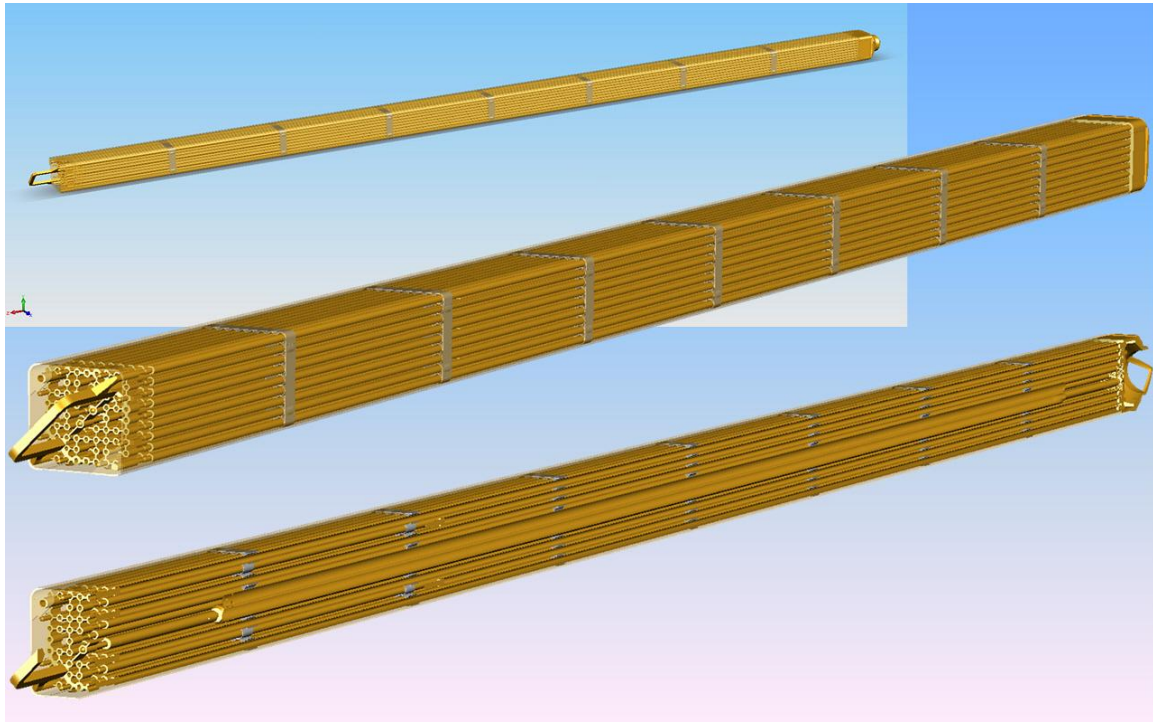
CAD solid model isometric and cross-sectioned views of the complete BWR fuel assembly from upper tie plate perspective.
